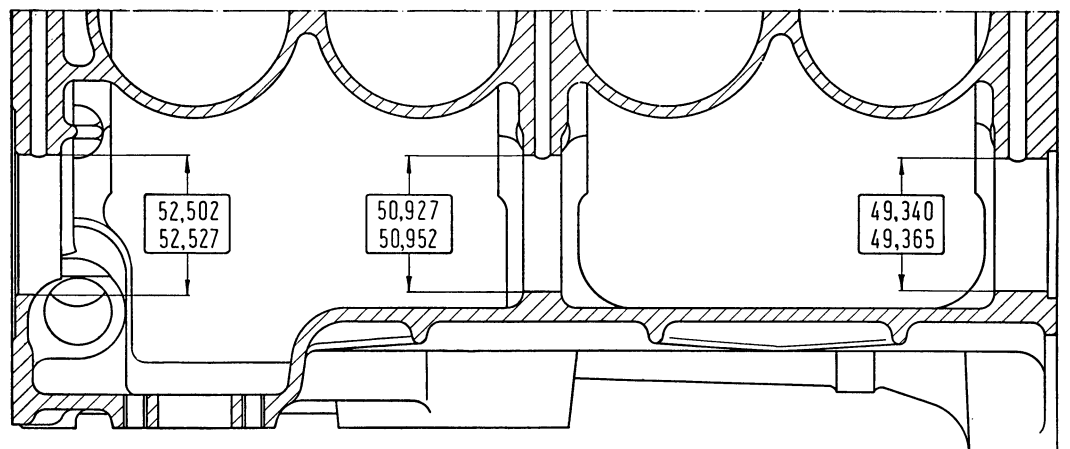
Critical dimensions (in mm) of camshaft, bushings and bushing seats.
